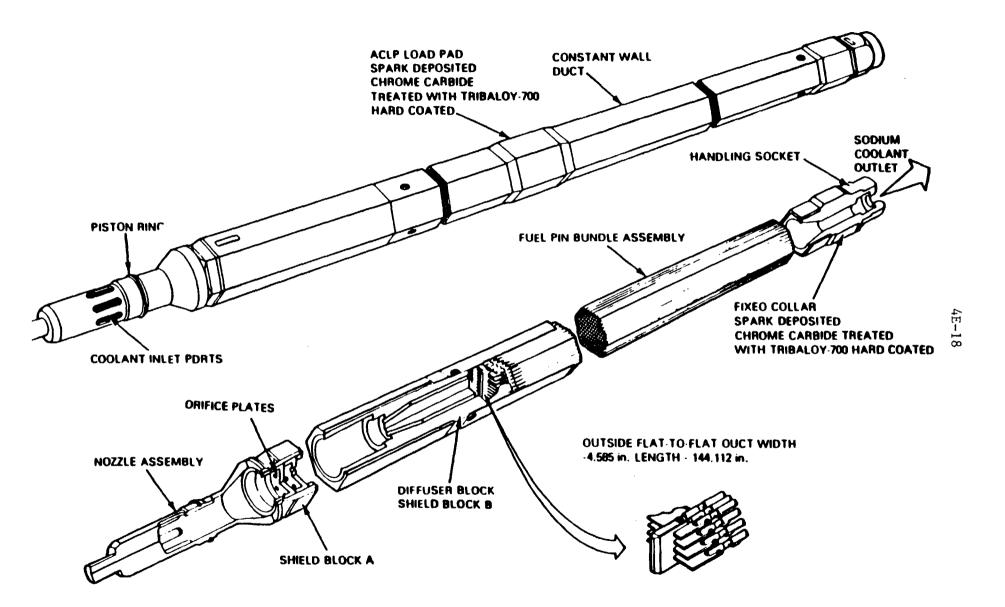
E.13. FFTF core demonstration experiment fuel assembly.
